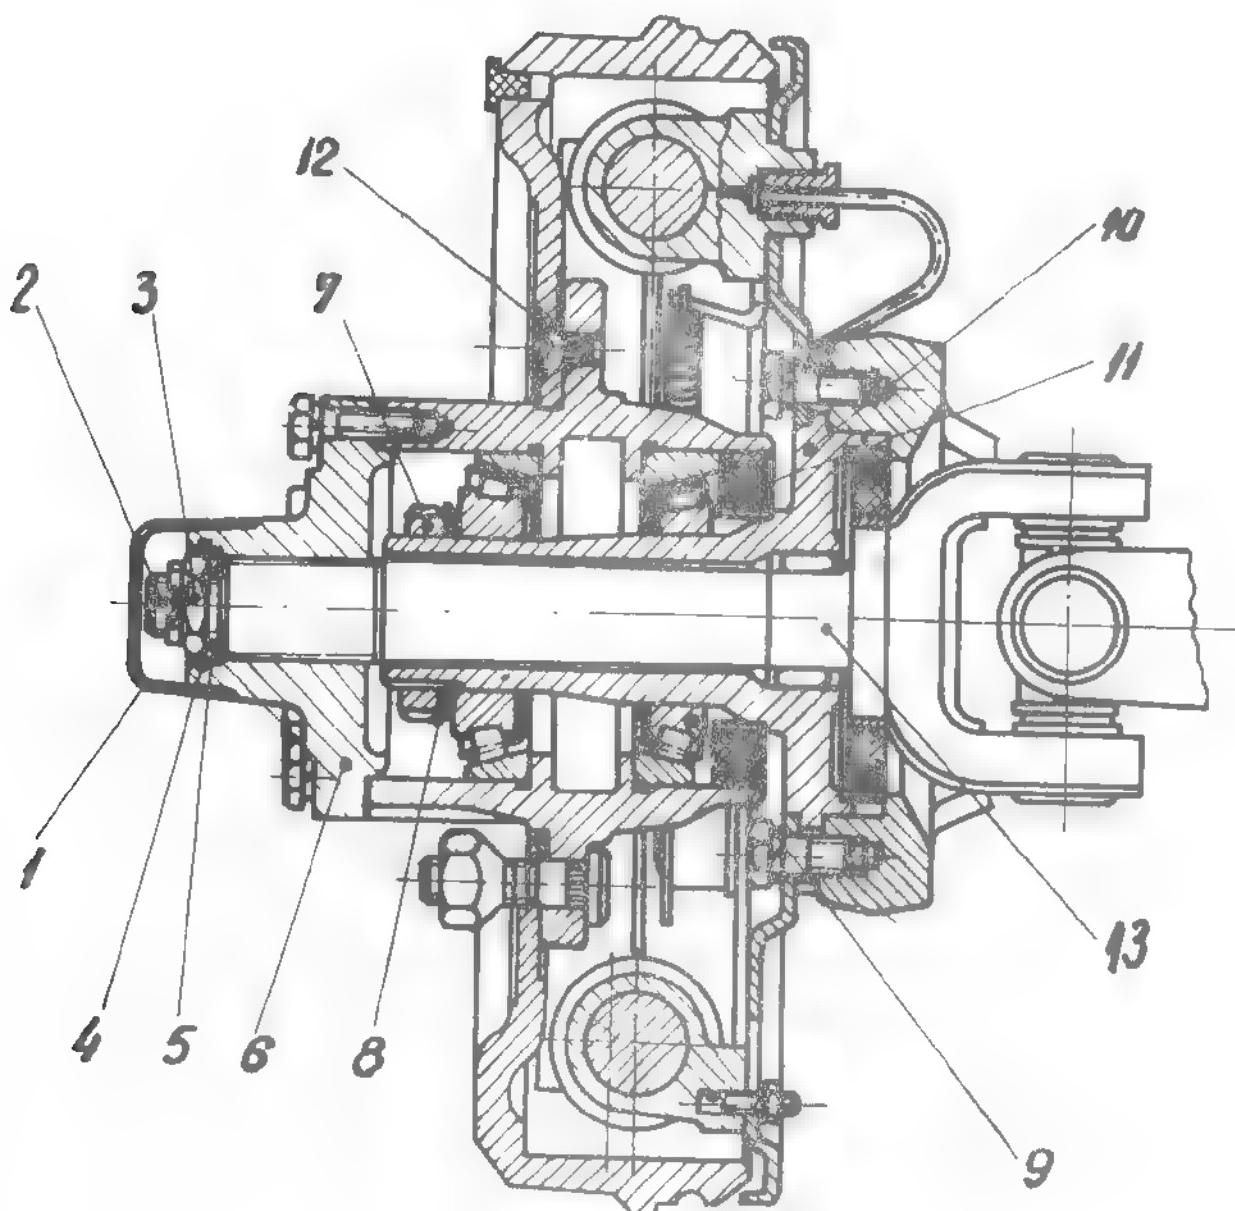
FRONT WHEEL BRAKE DRUM KING PIN ASSY.
